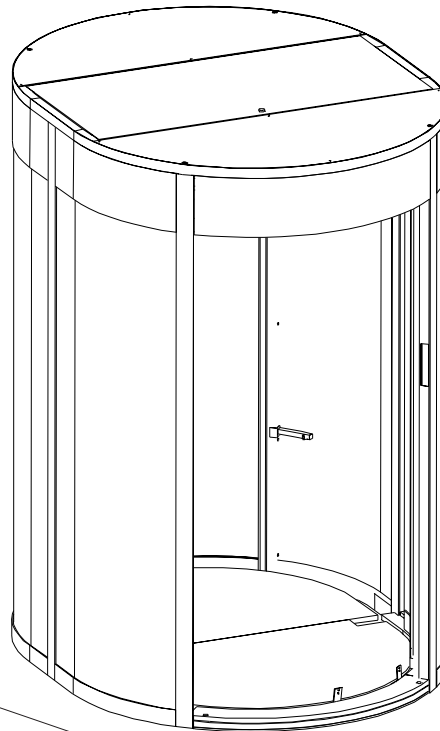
FLOOR EMBEDDED INSTALLATION
